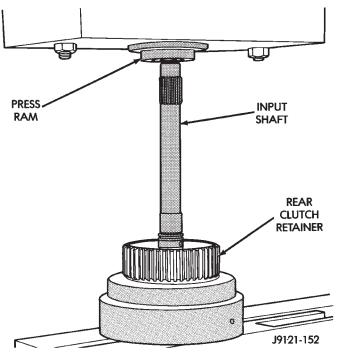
Pressing Input Shaft Into Rear Clutch Retainer
